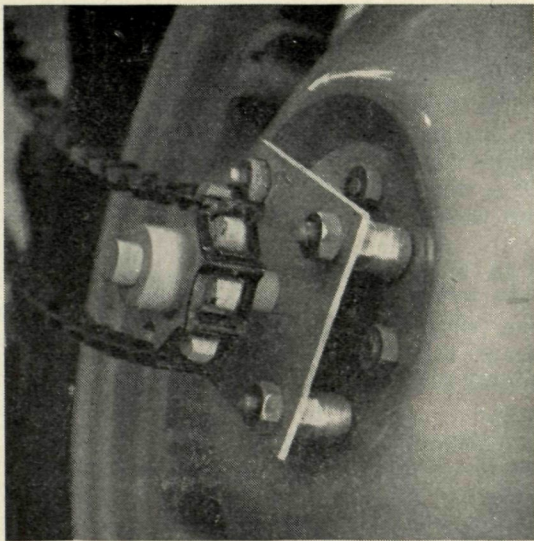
Showing method of attaching drive sprocket to rear wheel of tractor
